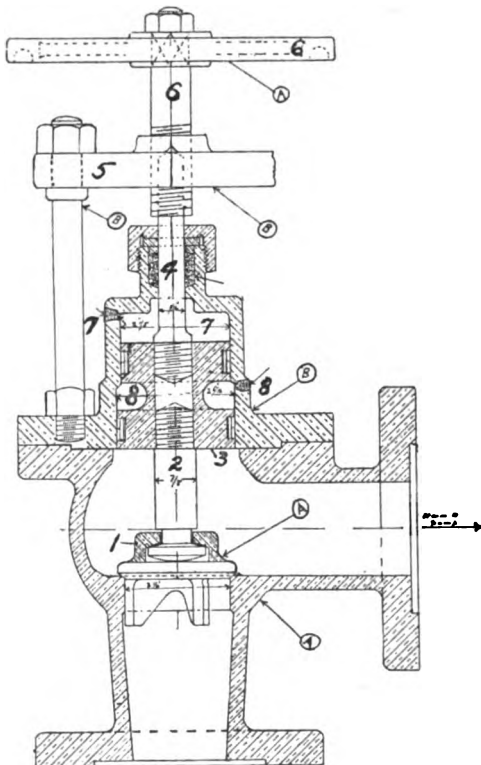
Automatic Regulating Throttle Valve for Feed Pump.
